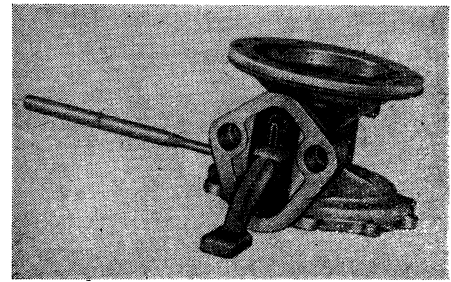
Series AJ. Retain rocker arm and link in body with assembly pin shown
